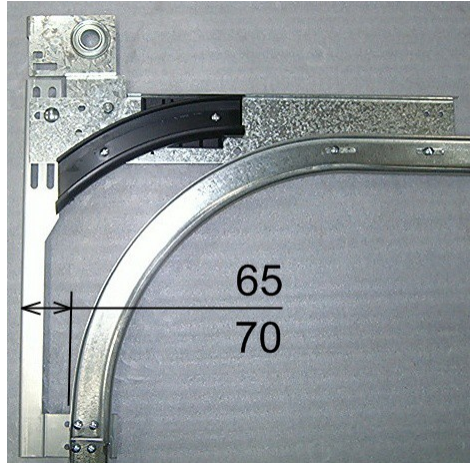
Low Headroom Front Track Assembly (Top Horizontal Track not shown). Plastic curve is shown mounted most rearward position (suits drum cable wheel inside end bearing). Can be mounted in front position (see Figure 4 - for drum cable wheel outside end bearing)
